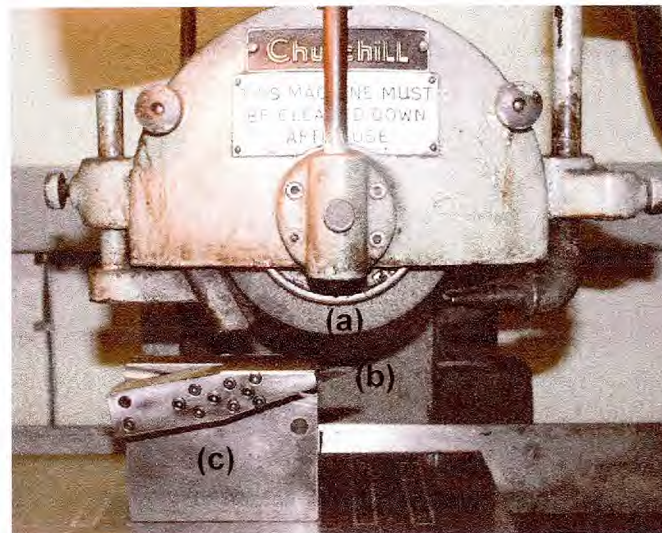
Jig set-up on a grinding machine to sharpen the cutting tool. (a) grinding wheel, (b) cutting tool and (c) tool sharpen jig.
